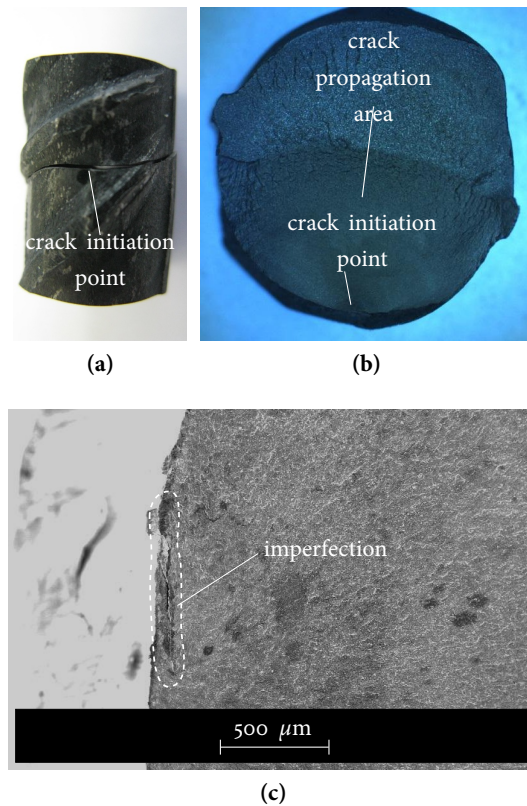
(a) Location where fatigue crack initiates on the surface of specimen 7; (b) OM image (10×) of the fractured cross section; (c) SEM image (65×) of the imperfection from where fatigue crack initiated.
